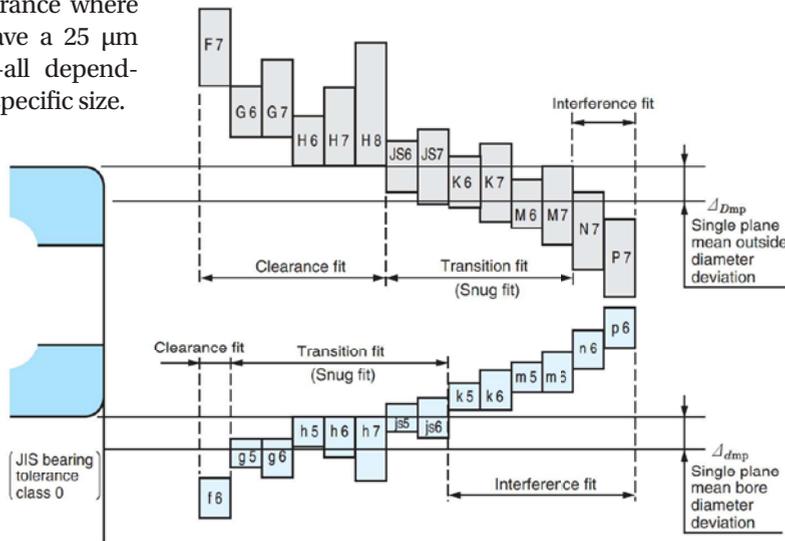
JTEKT Co. Cat B2001E-3 Ball and Roller Bearings Figure 9-1 p.A80
